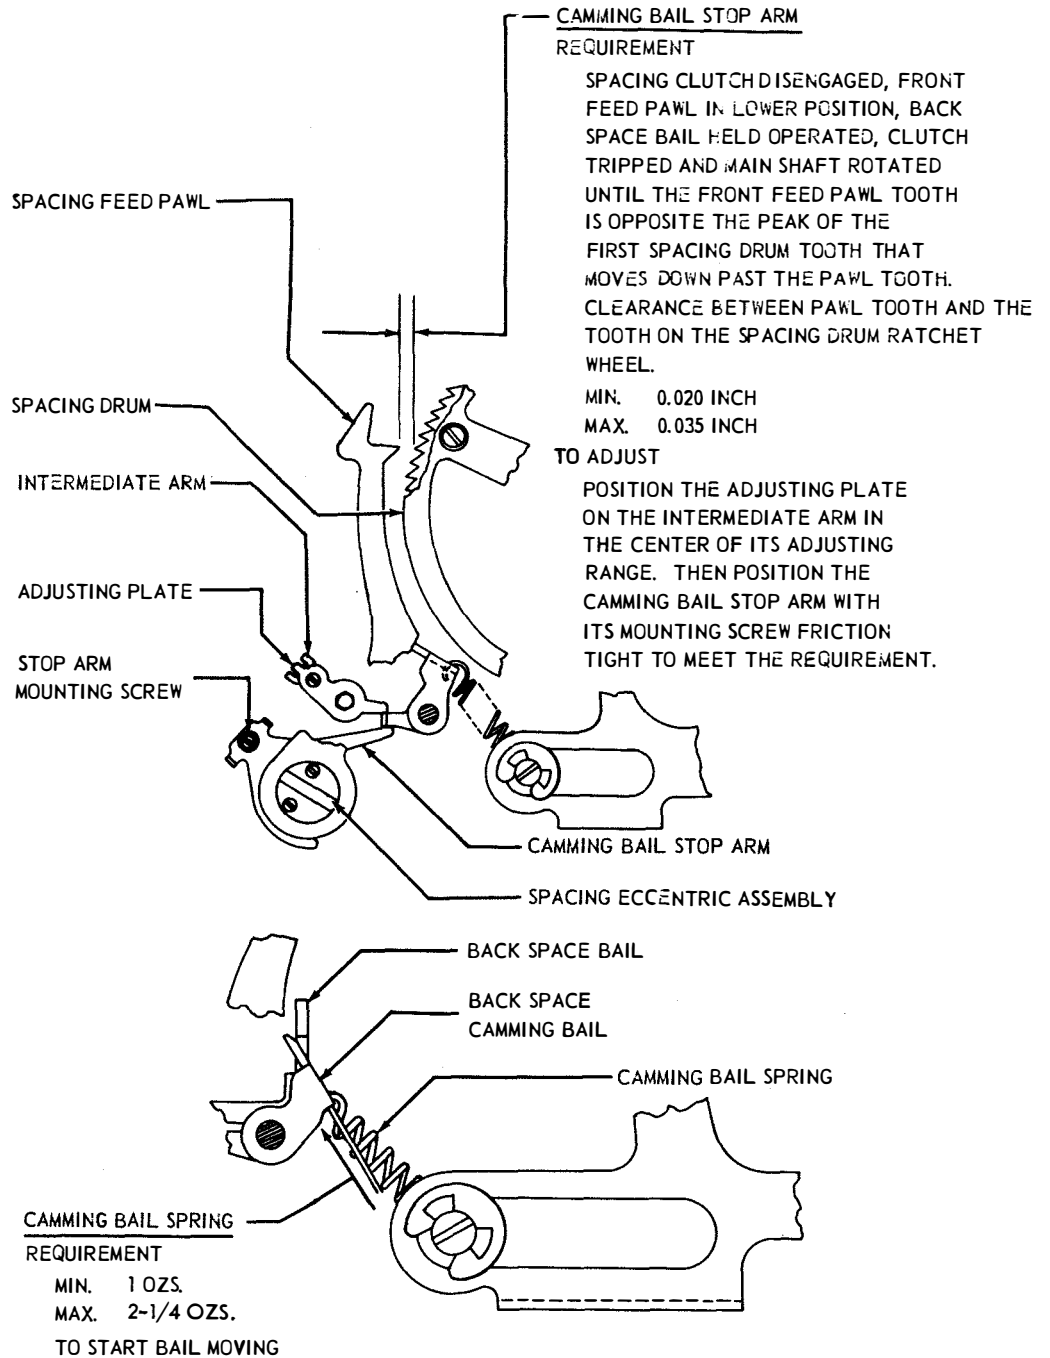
TYPING UNIT, BACKSPACE MECHANISM
